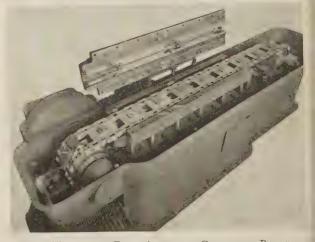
Horizontal, Fully Automatic, Continuous Broaching Machine, Designed for High-Production Work Ranging Upward of 1800 Pieces per Hour
